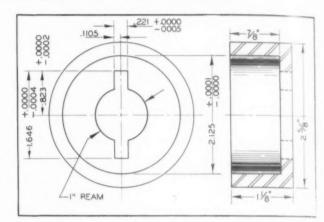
, Drive collar held to close limits of tolerance.
